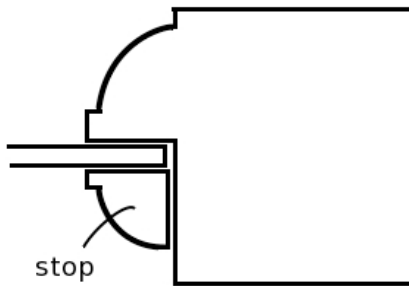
Sticking profile #2 – 10-light doors, 1 3/8" stock
